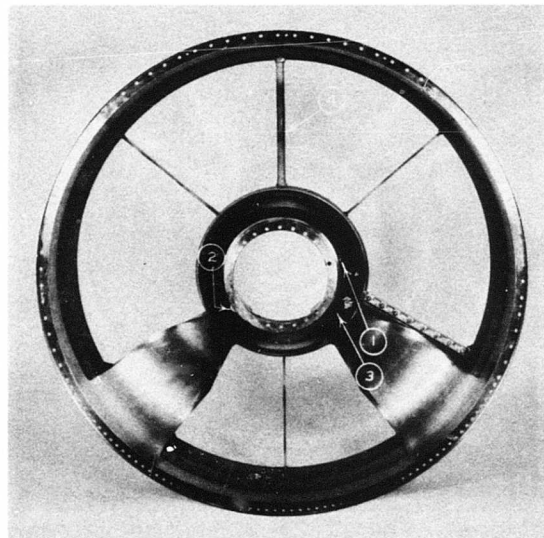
Interior View of Front Housing: (1) Oil Jet, (2) Breather Hole, (3) Drive Shaft Boss, (4) Oil Scavenge Line.
